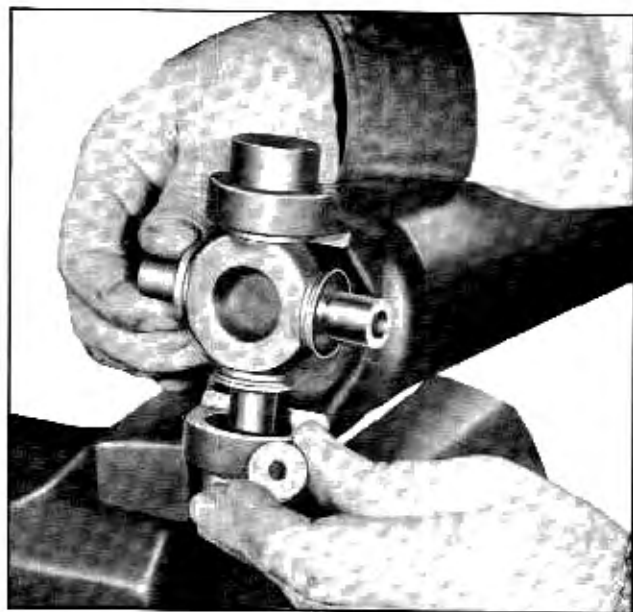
Placing Washers Inside Bearing of Fixed Yoke Member
